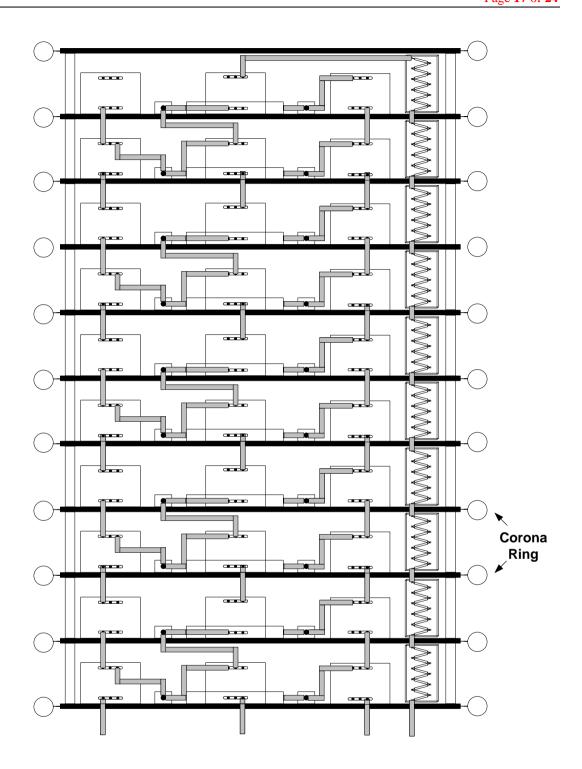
Cross Sectional View of CW-Multiplier assembly inside the HV tank
